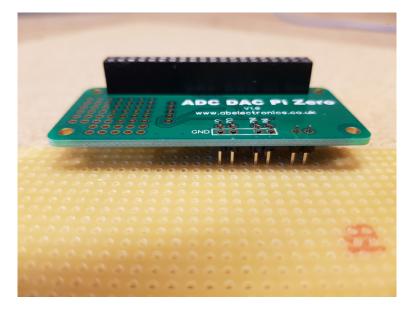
Mounting the extra pins on the ADCDAC. The prototype circuit board below is used only to stabilize the pins while soldering.
